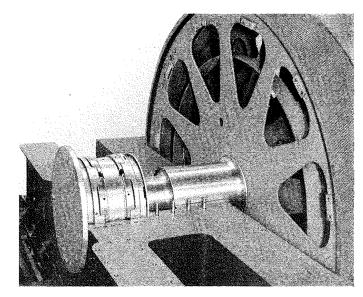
Six-shoe thrust bearing at forward end of reduction gear for steam turbine drive.
